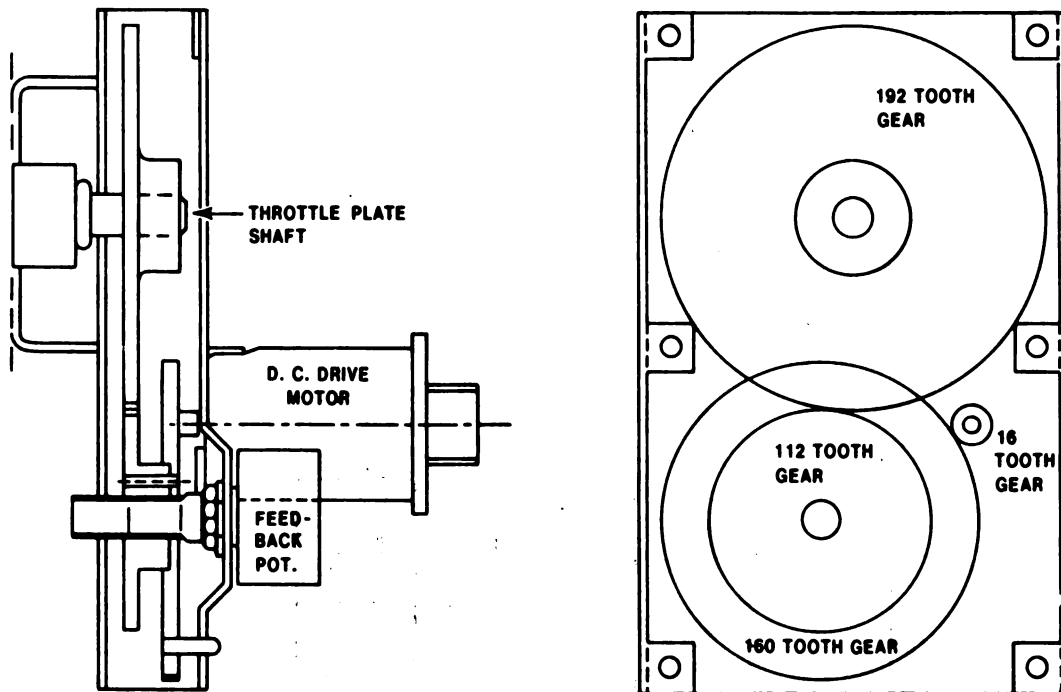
Air Intake and EGR Throttle Valve Positioner
